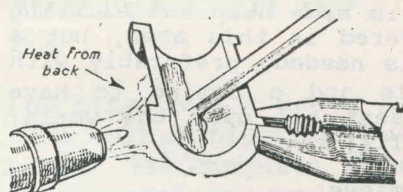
Tinning the bearing shell by heating it from the back while a stick of solder is rubbed over the bearing surface.
